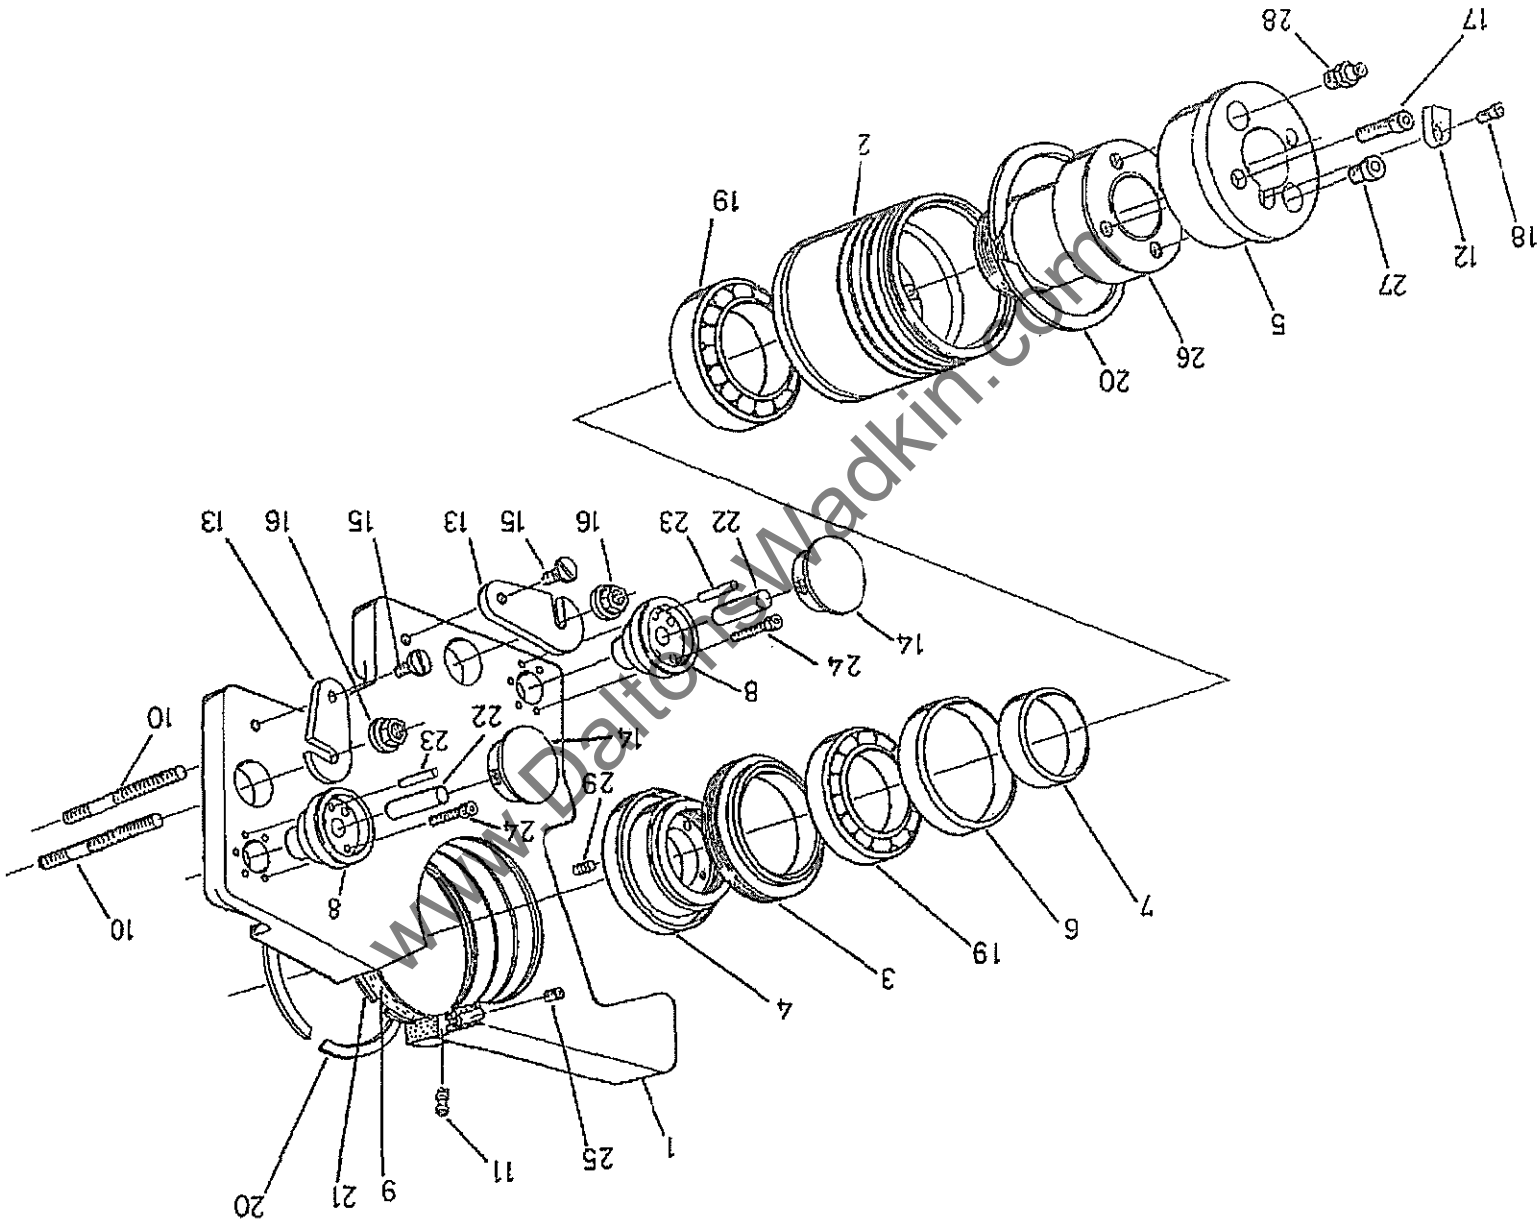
OUTBOARD BEARING - BOTTOM HEAD
